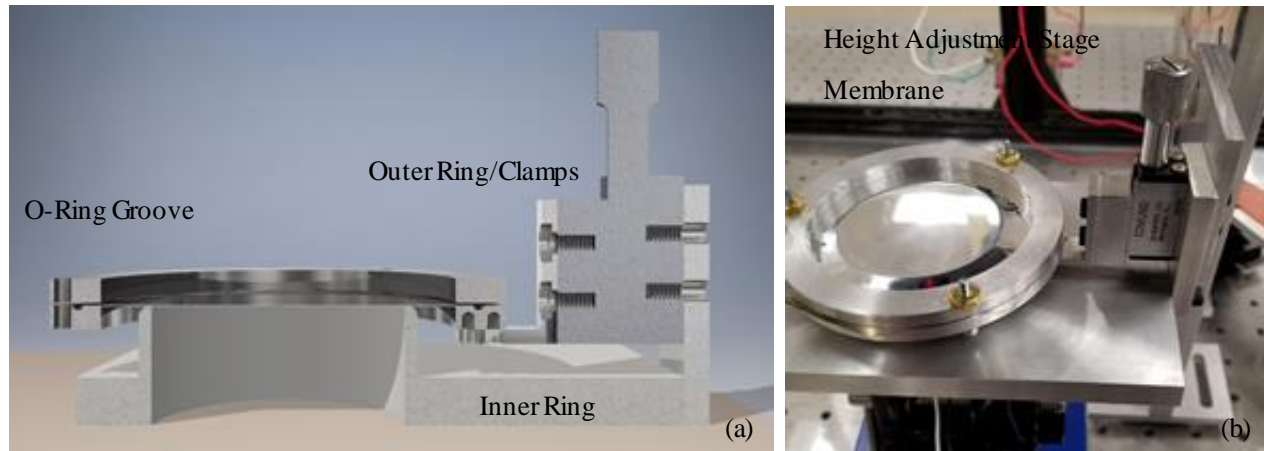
Membrane Holder: (a) a cross-sectional drawing and (b) a picture of the actual membrane holder.
